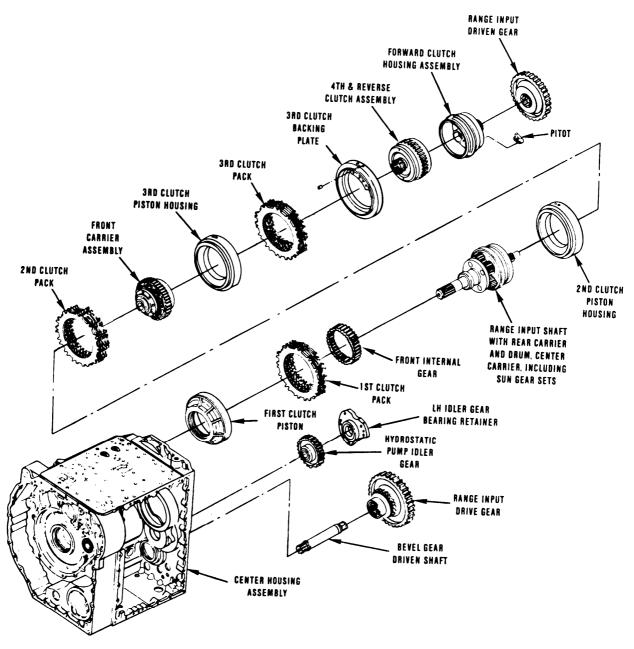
Exploded View of Major Components--Left Side of Center Housing Assembly
